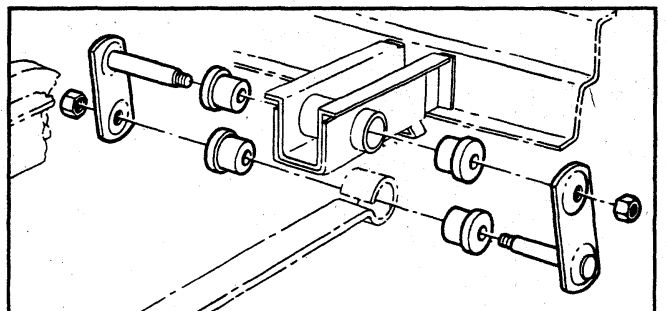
Rear Spring Shackle Exploded View—All Except Station Wagon (Chevy II)
